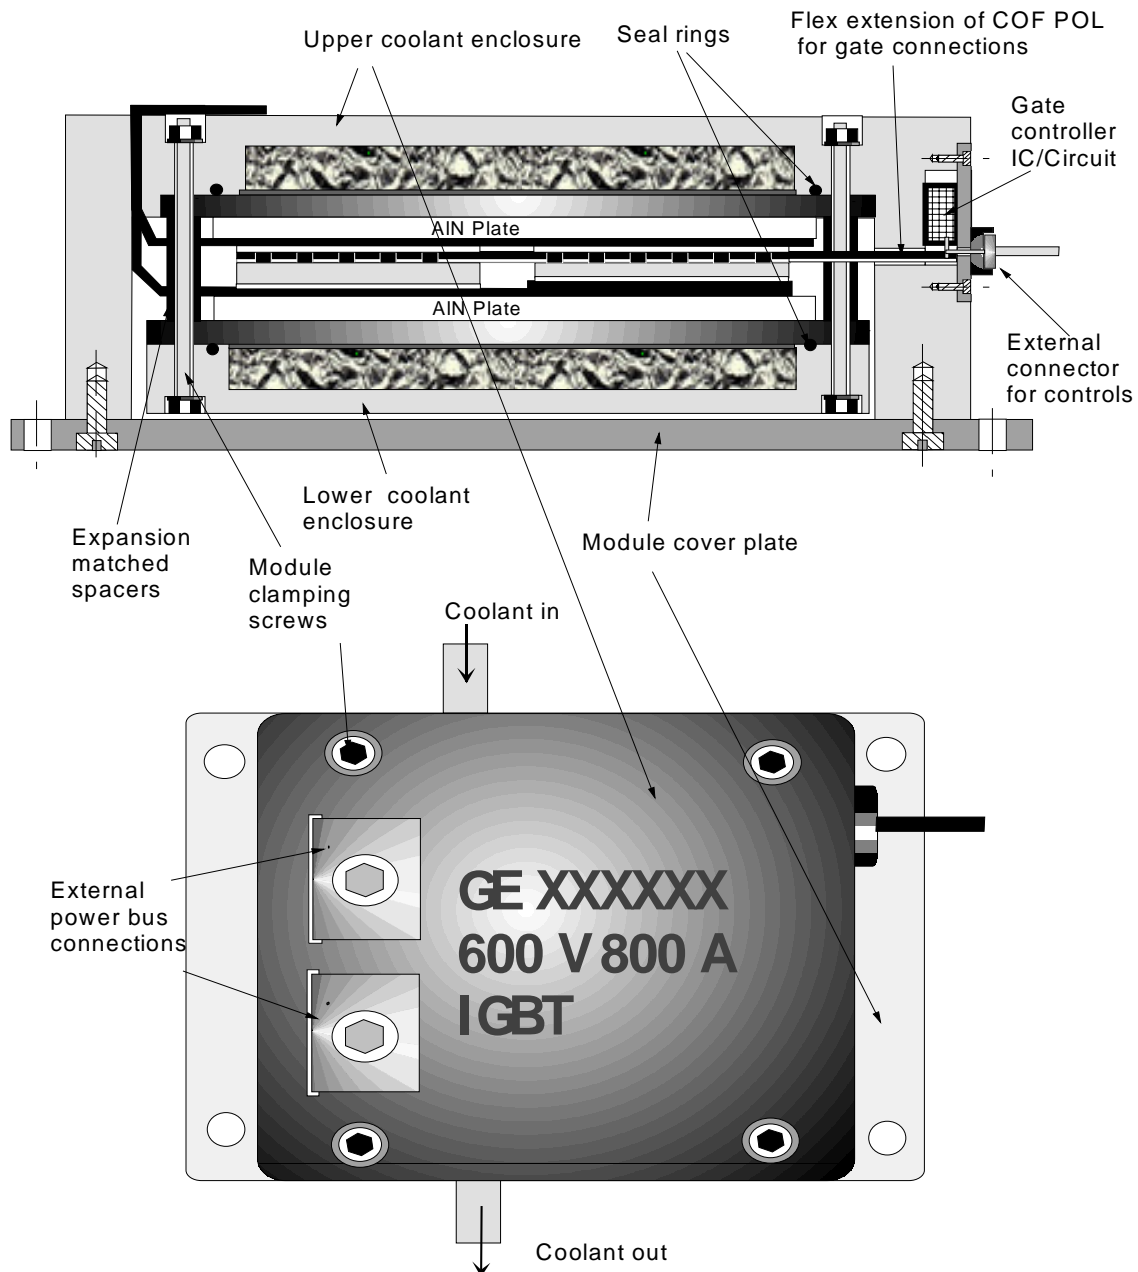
A cross section and top view of a non-hermetic double sided cooled POL based power module with integral heat exchangers.
